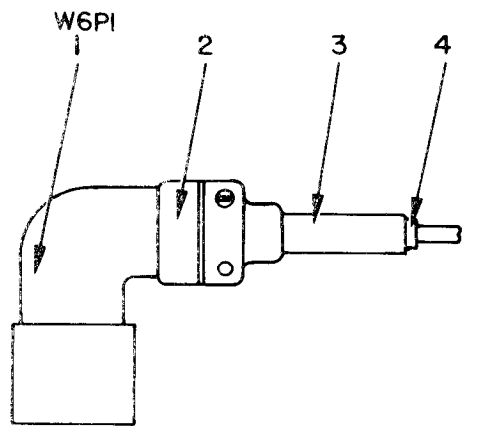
Cable Assembly, Special Purpose, Electrical CX-8997/URM-157.
